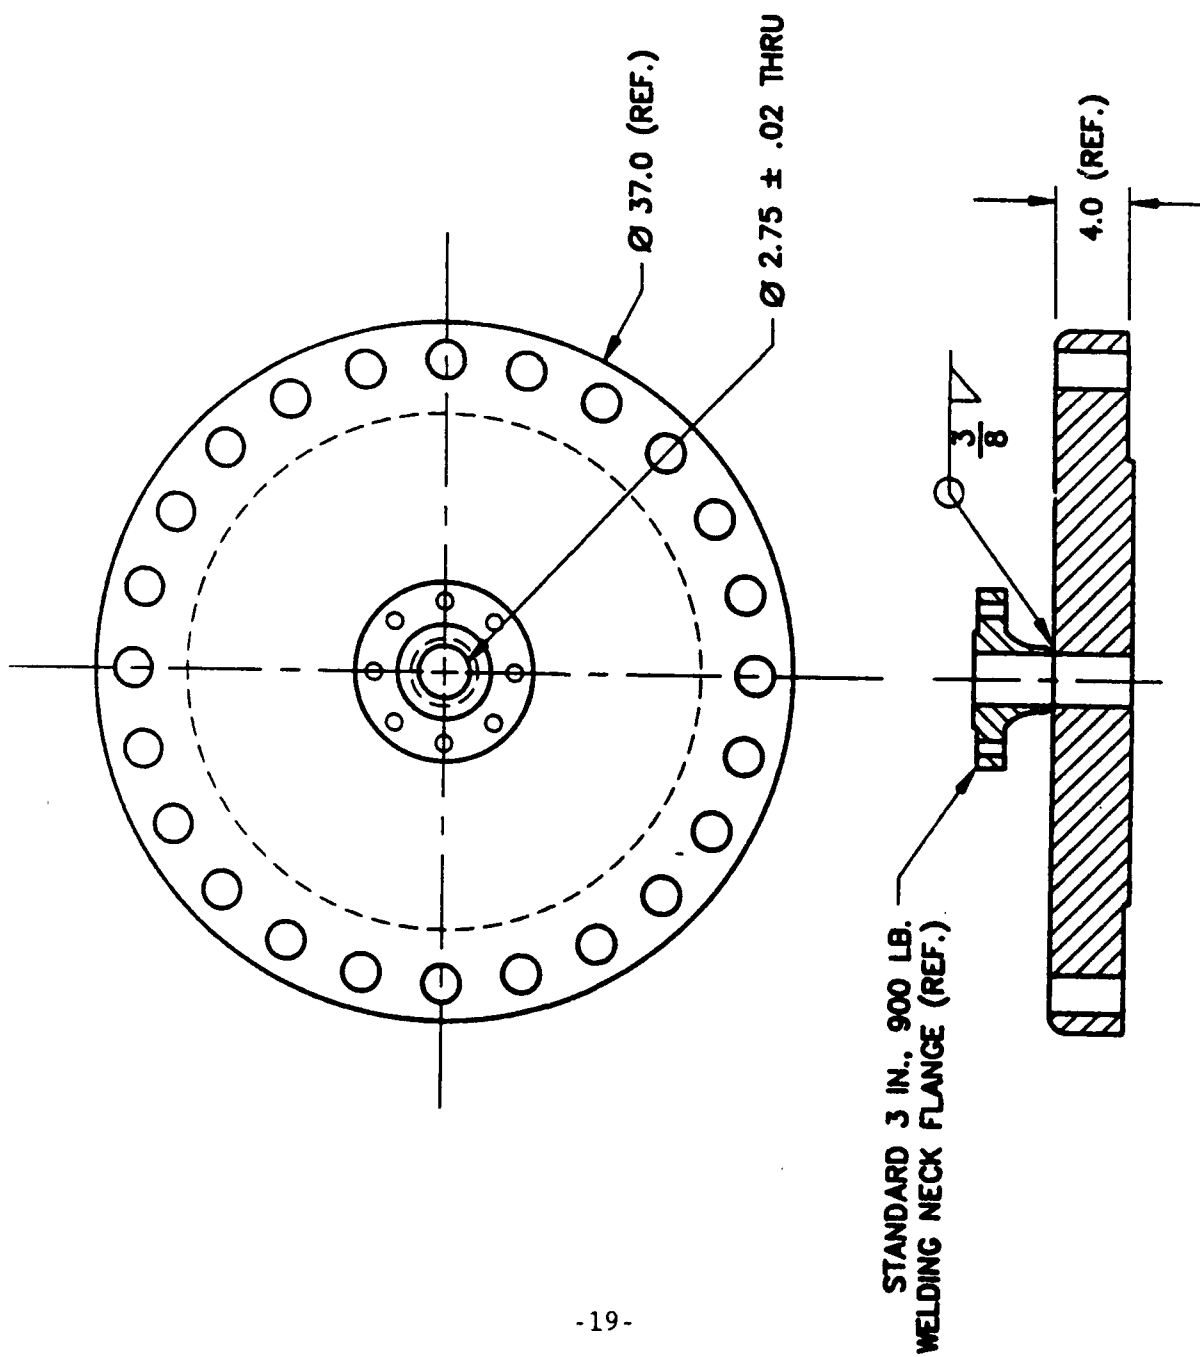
Design Drawing of Pressure Vessel - Top View Showing Upper Port Penetration.
